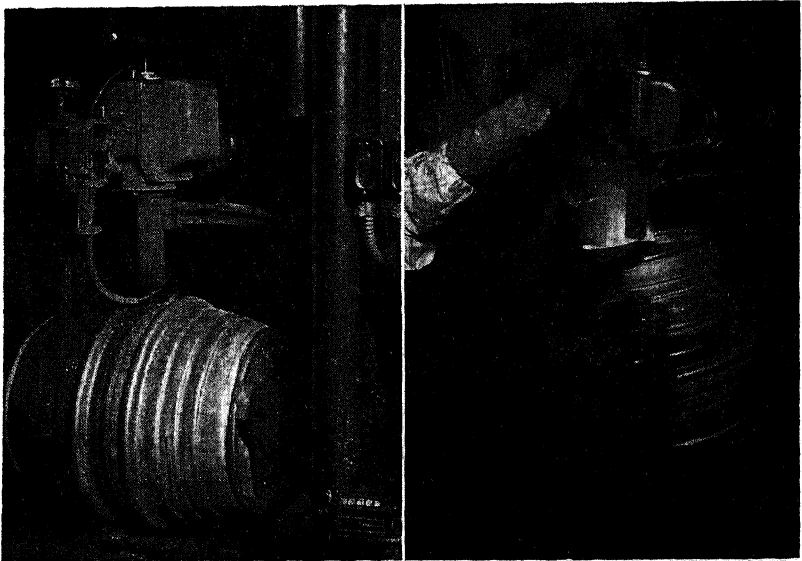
Left: Set-up for making the girth weld of a beer barrel by the automatic carbon arc process. Right: Welding the ends of beer barrels by the automatic carbon arc process.
